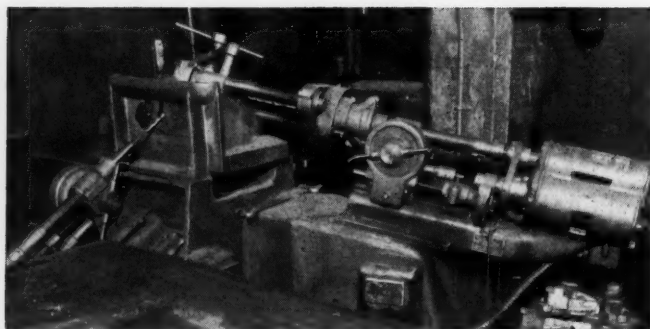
Drilling machine comprising two Avey independent drilling units, arranged so that the chips will fall out of the drilled holes by gravity.
